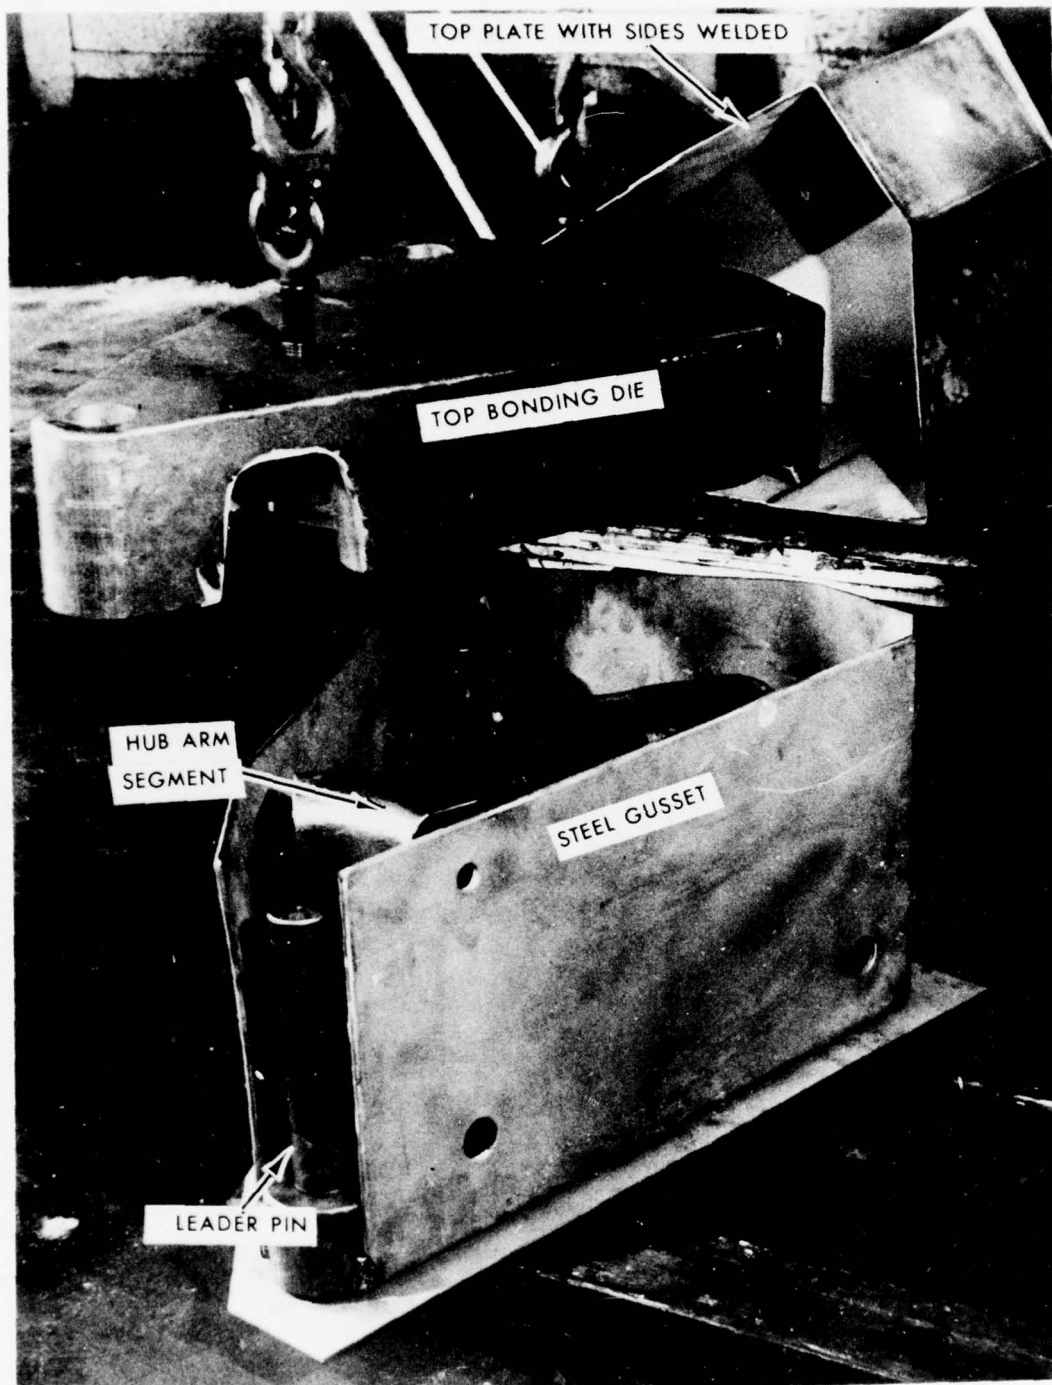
BONDING DIE, GUSSET PLATE, AND HUB SEGMENT ASSEMBLY FOR THIRD HUB ARM.
